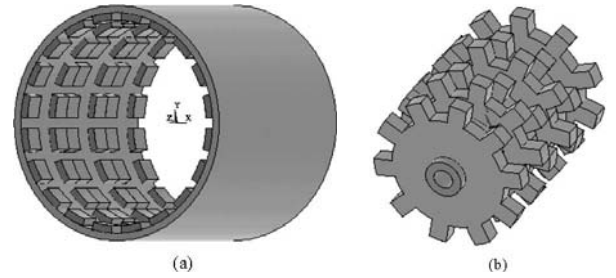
Magnetically relevant parts of SMC TFM, (a) rotor and (b) stator
